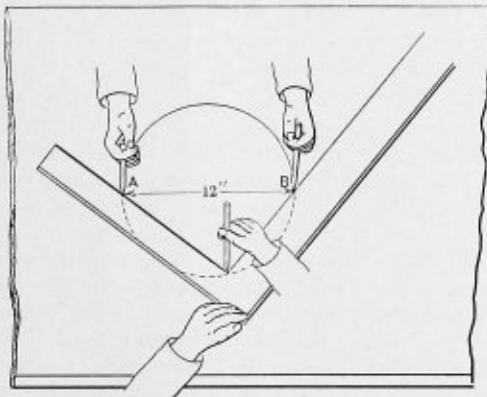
DRAWING A CIRCLE WITH A SQUARE
